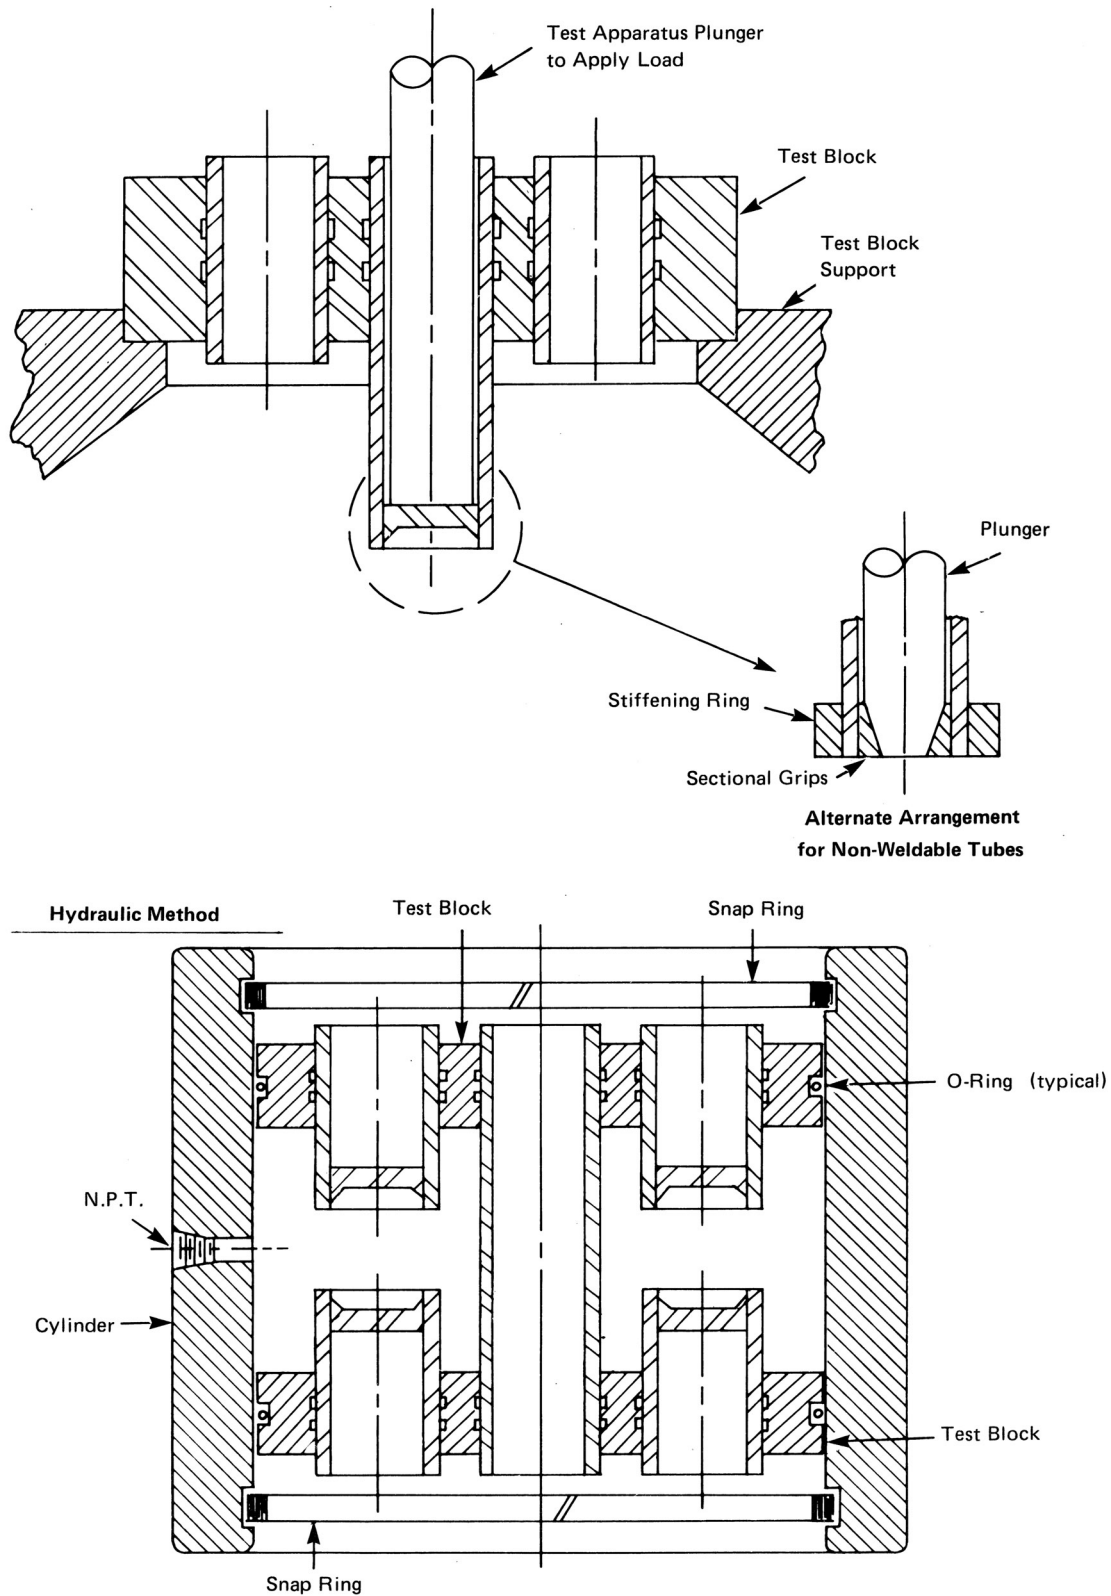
TYPICAL TEST FIXTURES FOR EXPANDED OR WELDED TUBE-TO-TUBESHEET JOINTS
